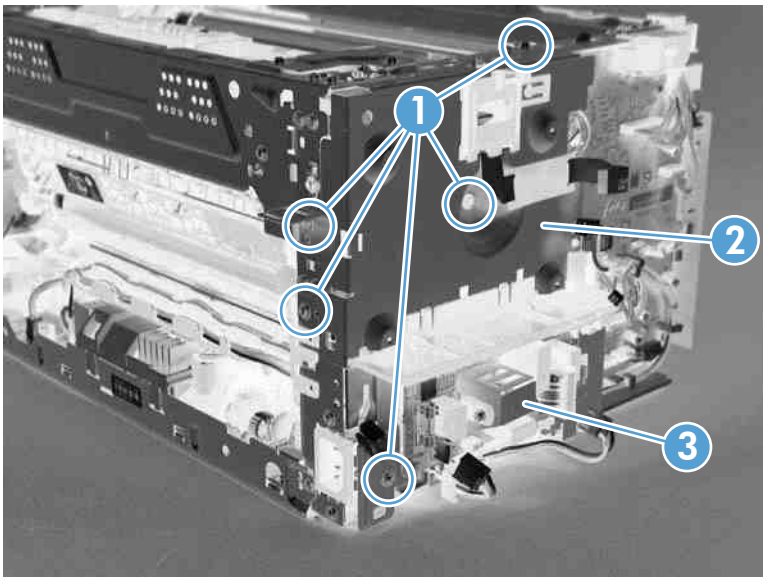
Remove the fuser delivery assembly (1 of 6)
